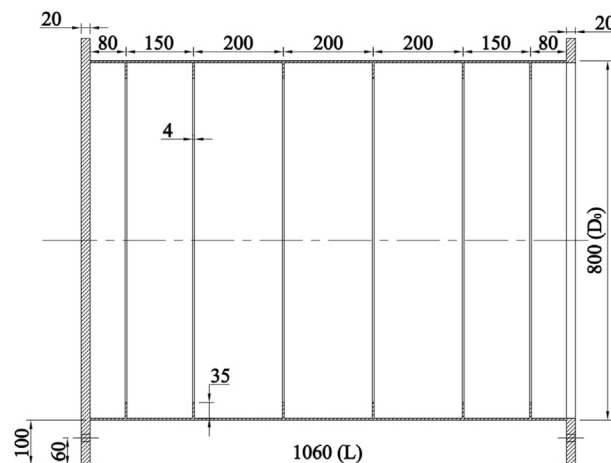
Dimensions of the ring-stiffened cylinder model (unit: mm).
